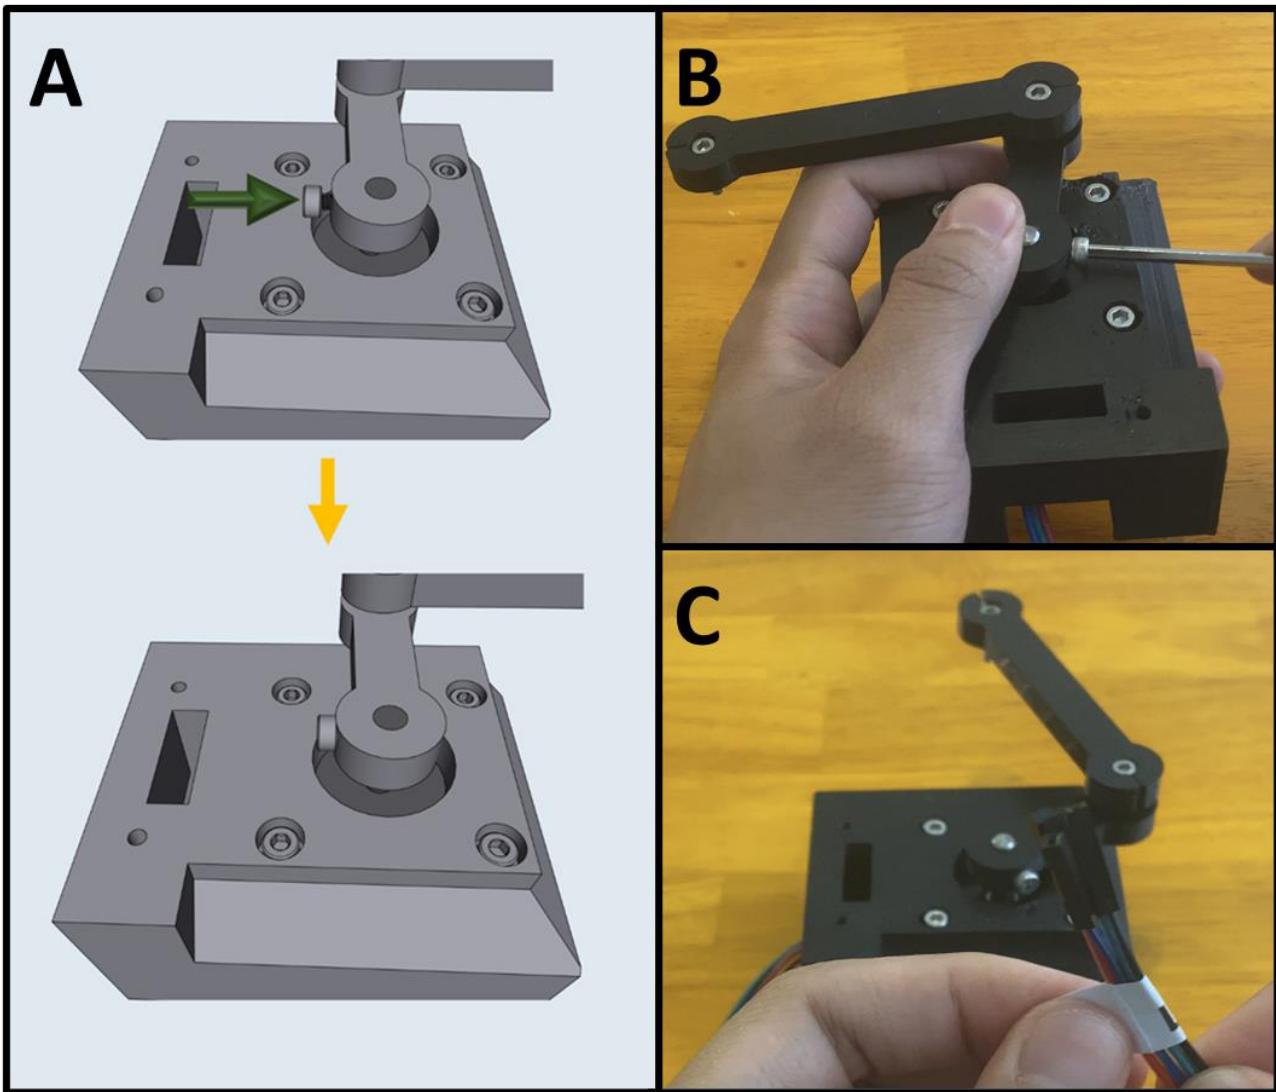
c: The procedure for tightening the arm assembly onto the lower stepper motor.
